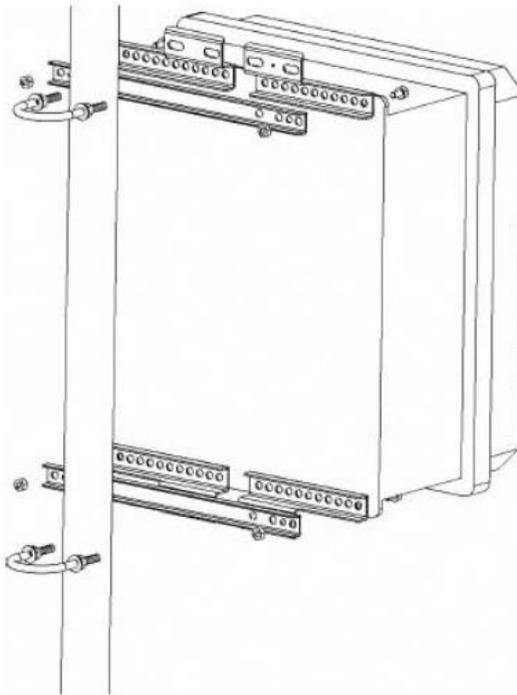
This exploded view shows the components of a mast mounting bracket.
